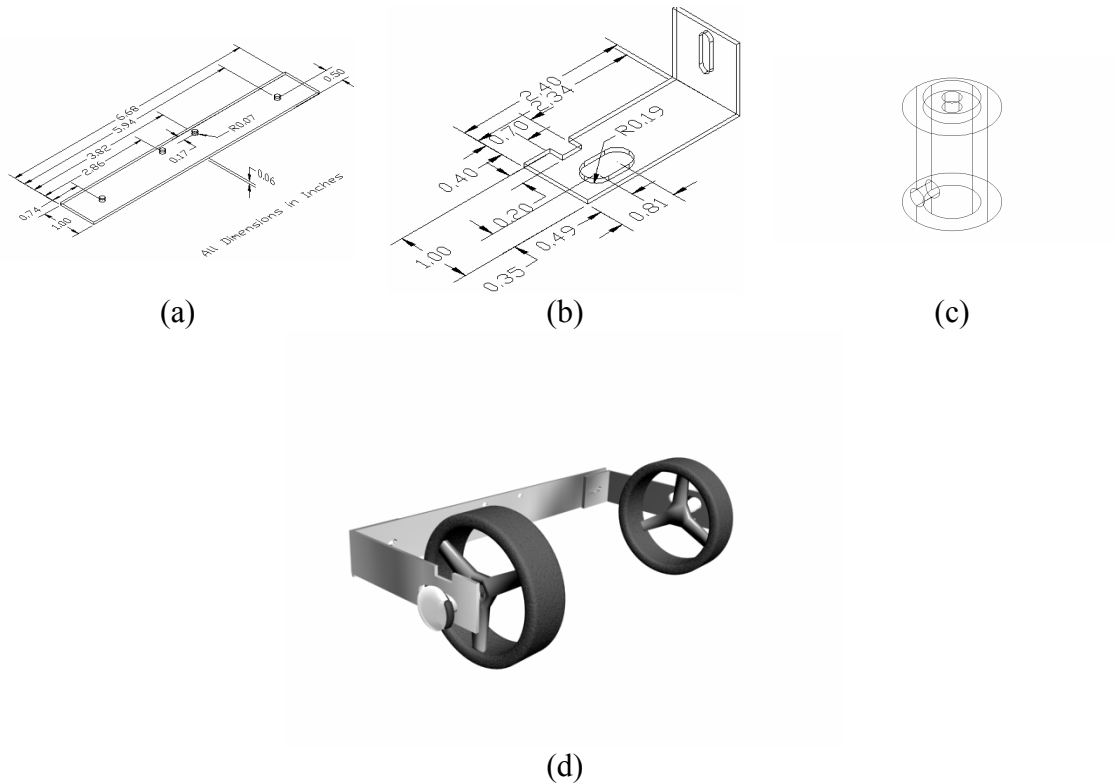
Wheel assembly modeled in AutoCAD, and assembled in 3D Studio Max. (a) Base extension, (b) Angle bracket, (c) Shaft coupler, and (d) Wheel assembly.
